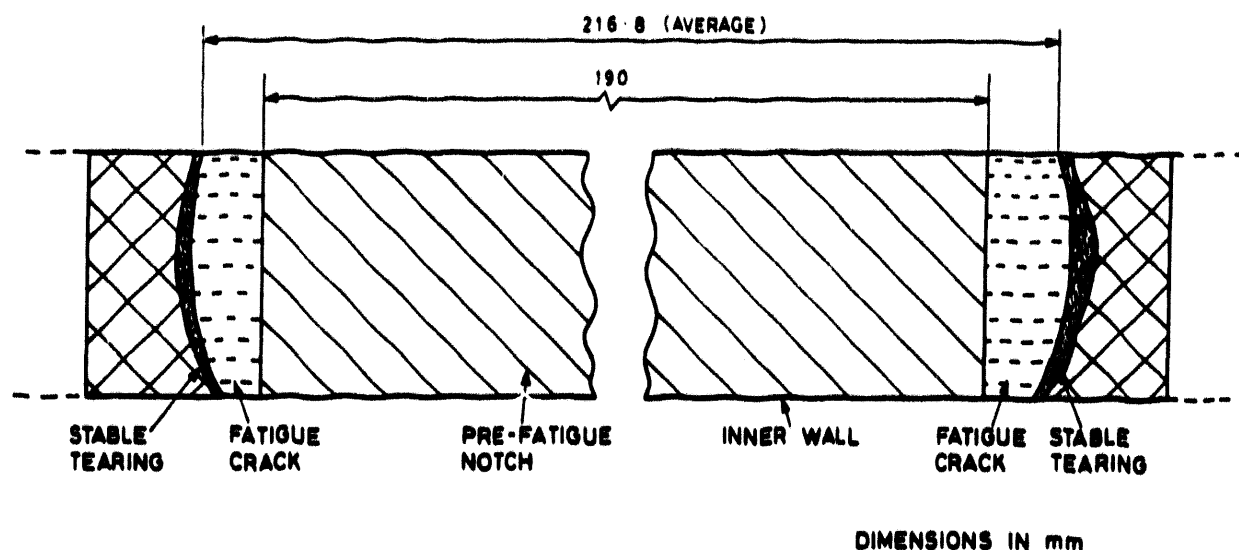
THE STRAIN AGEING VESSEL FRACTURE SURFACE
